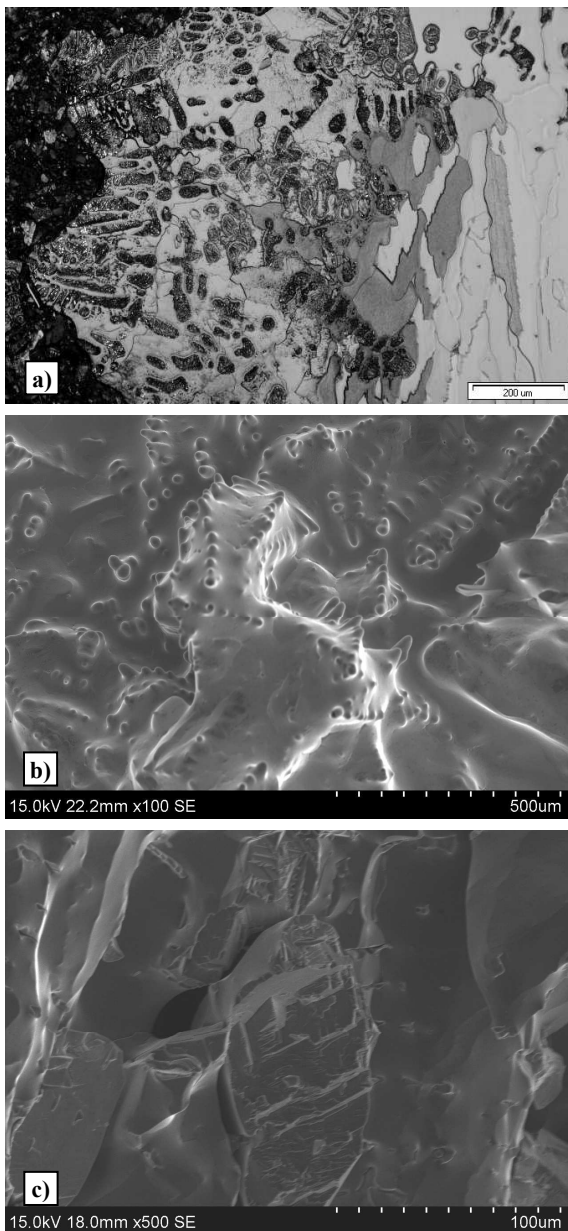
Fracture of Ni₃Al after Gleeble simulation: a) structure after NST test, (LM), b) fracture after NST test (SEM), c) fracture after DRT test (SEM).
